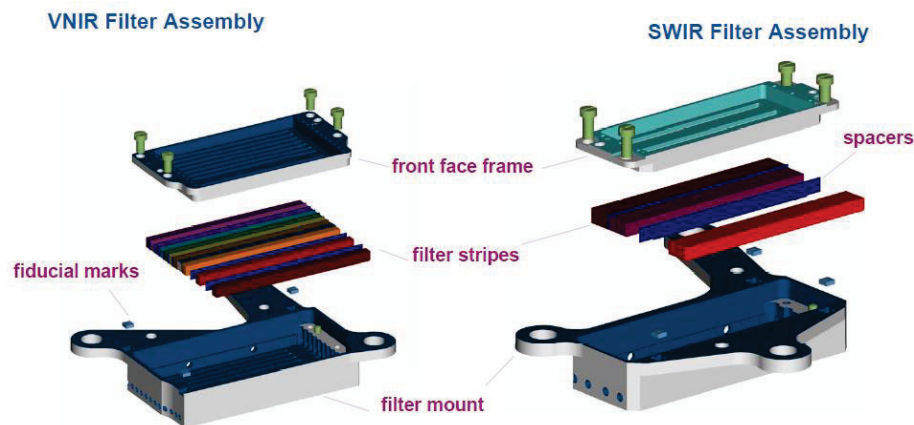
VNIR (left) and SWIR (right) filter assemblies – exploded assembly drawings
